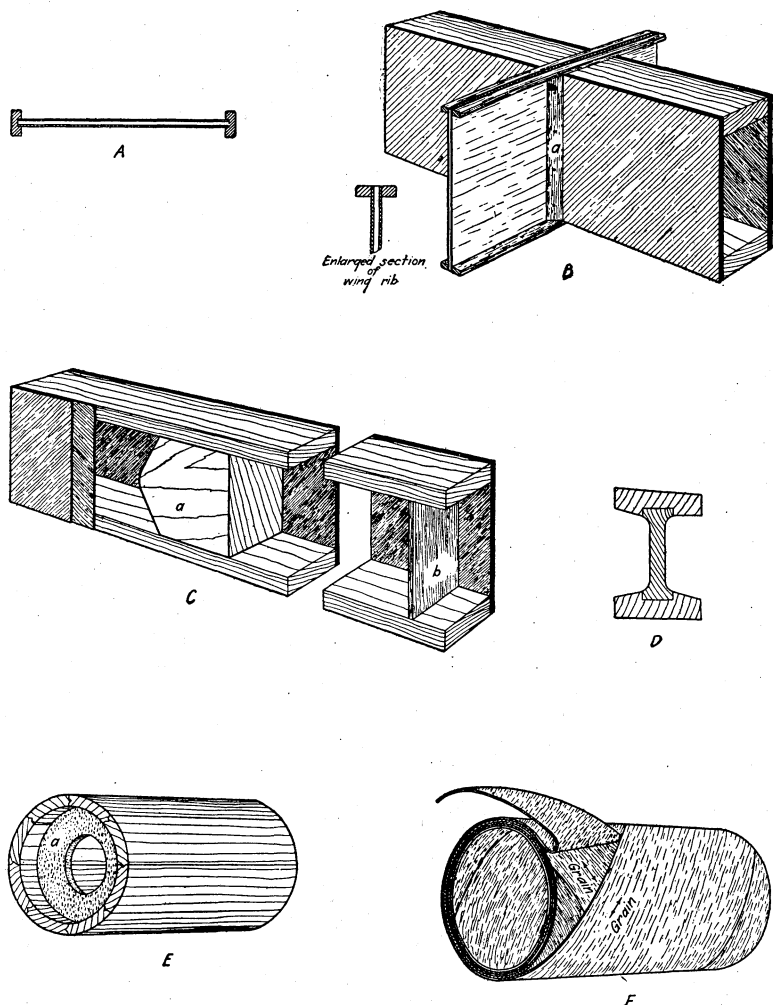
Special joints made in aircraft: A, Section of wing ribs; B, wing rib-beam assembly; C, details of box-beam construction; D, cross section of laminated I beams; E, built-up laminated construction (airship); and F, wrapped veneer member
